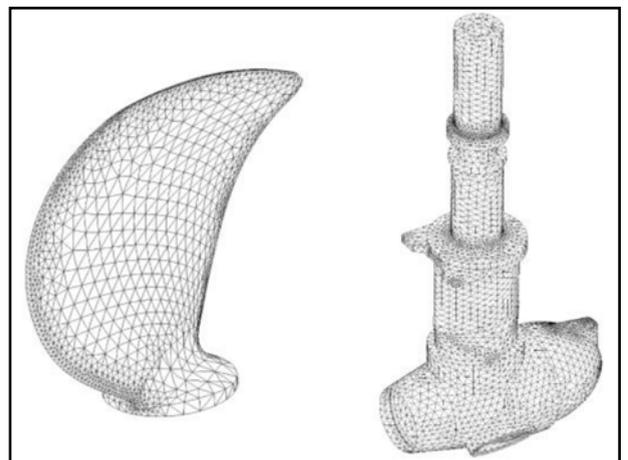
Finite-element model of the propeller blade (left) and the thruster housing (right).
